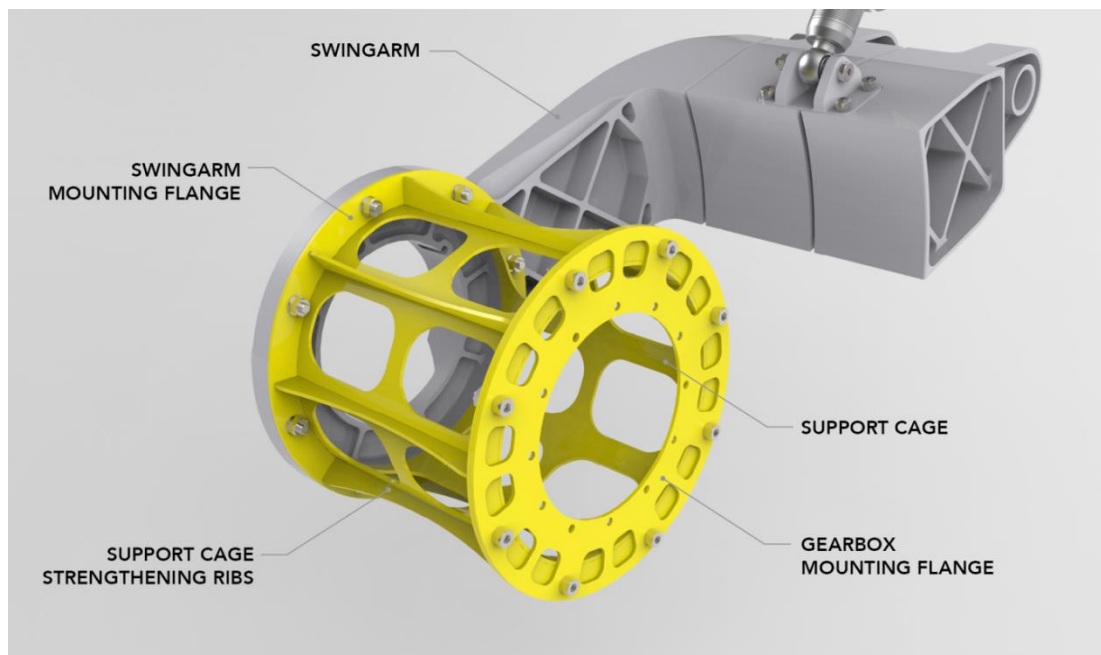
The support cage mounted to the swingarm suspends the drive unit in place.
